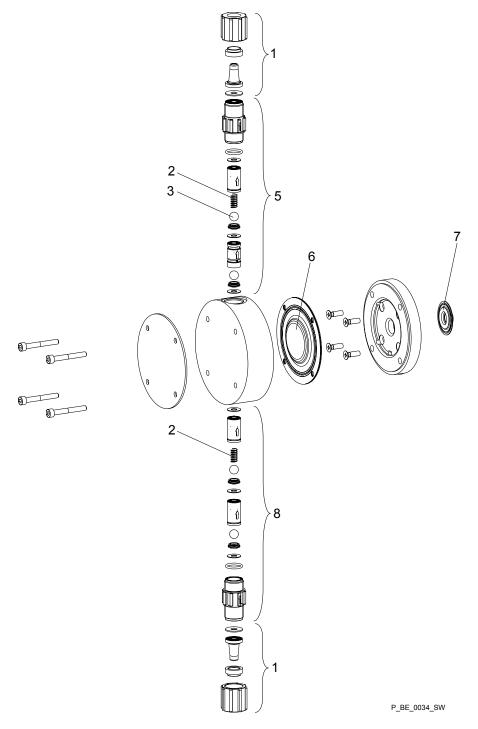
Liquid end gamma/ L 0232 PV without bleed valve
